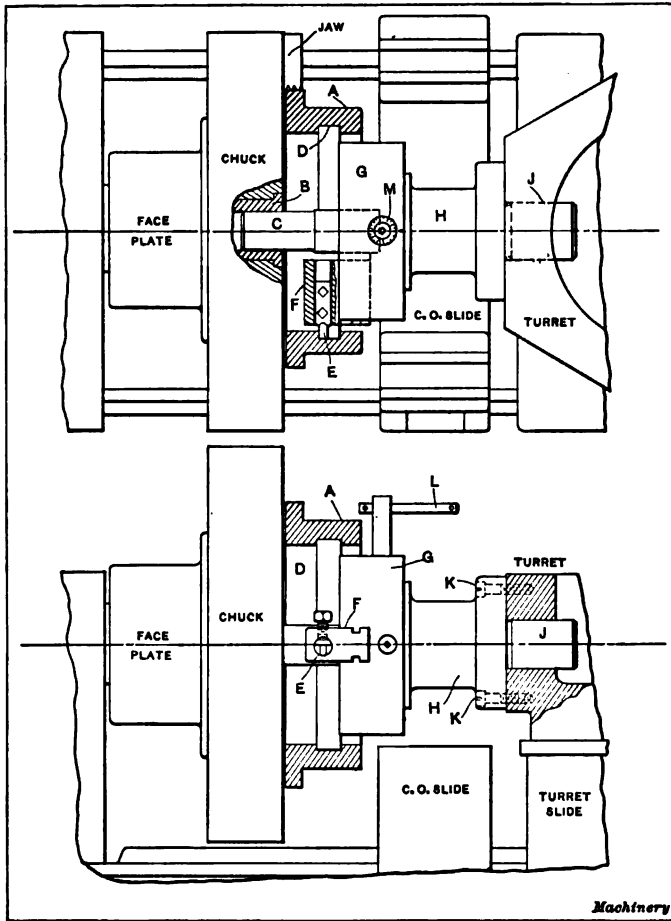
A Recessing Tool for a Large Collar, used in a Turret Lathe
